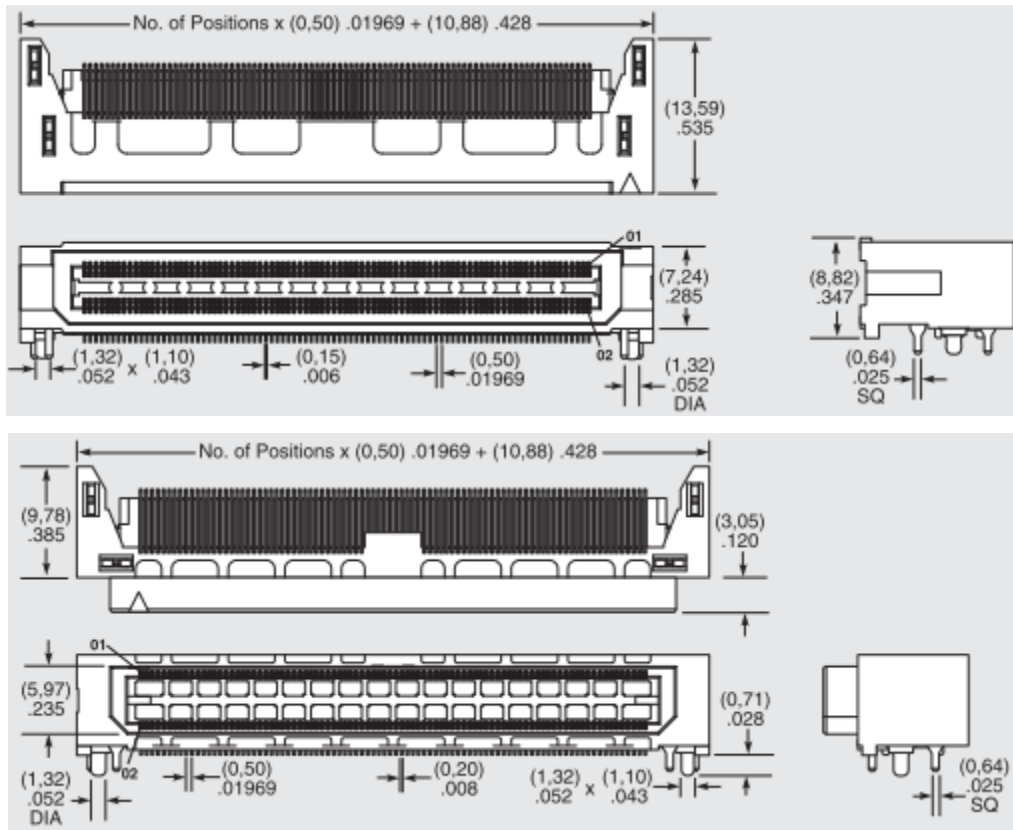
CPU to MAC Board to Board Connector Dimension
